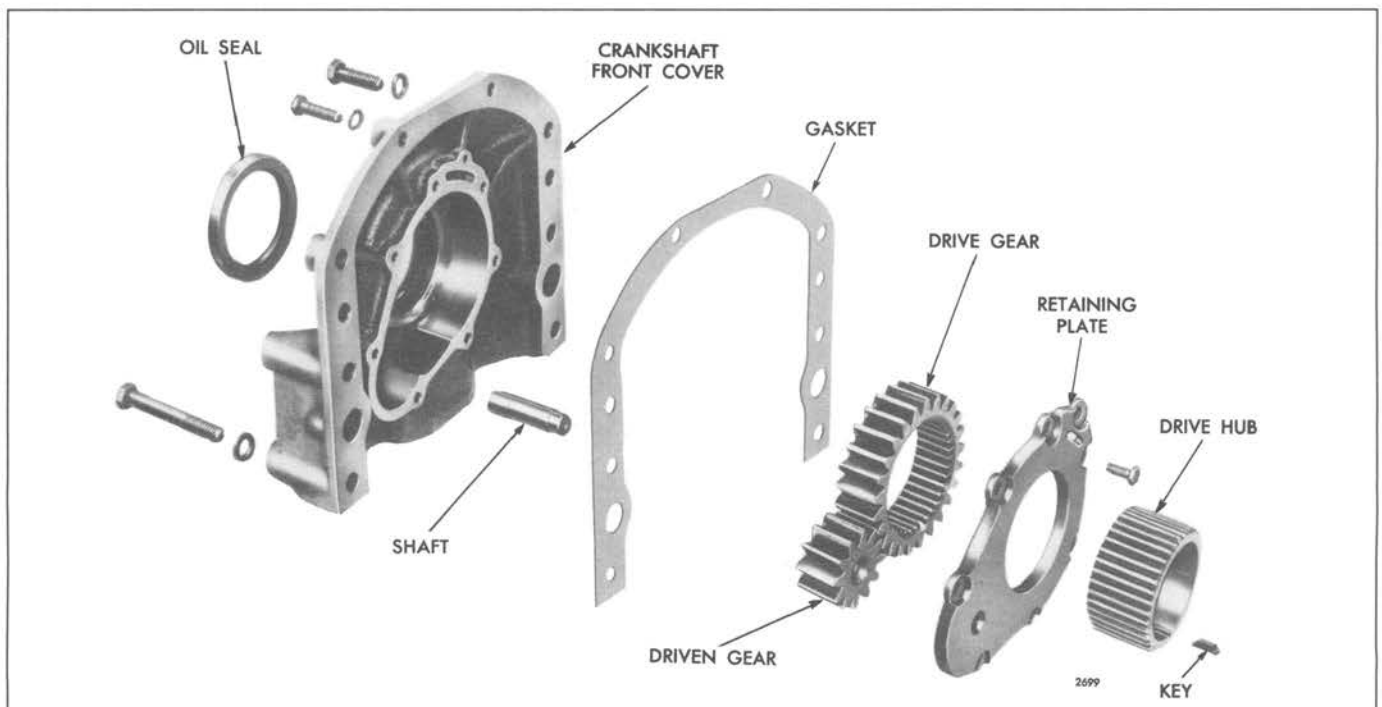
Front Cover Details and Relative Location of Parts (6V-92 and 8V-92 Engines)
